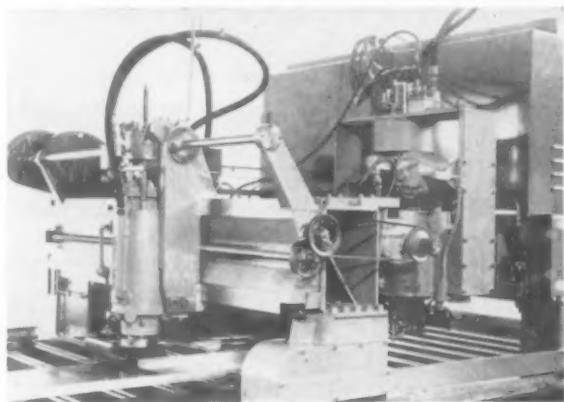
This Onsrud A-72 Invomill was designed and built specifically to machine skins and structures required for jet aircraft.
